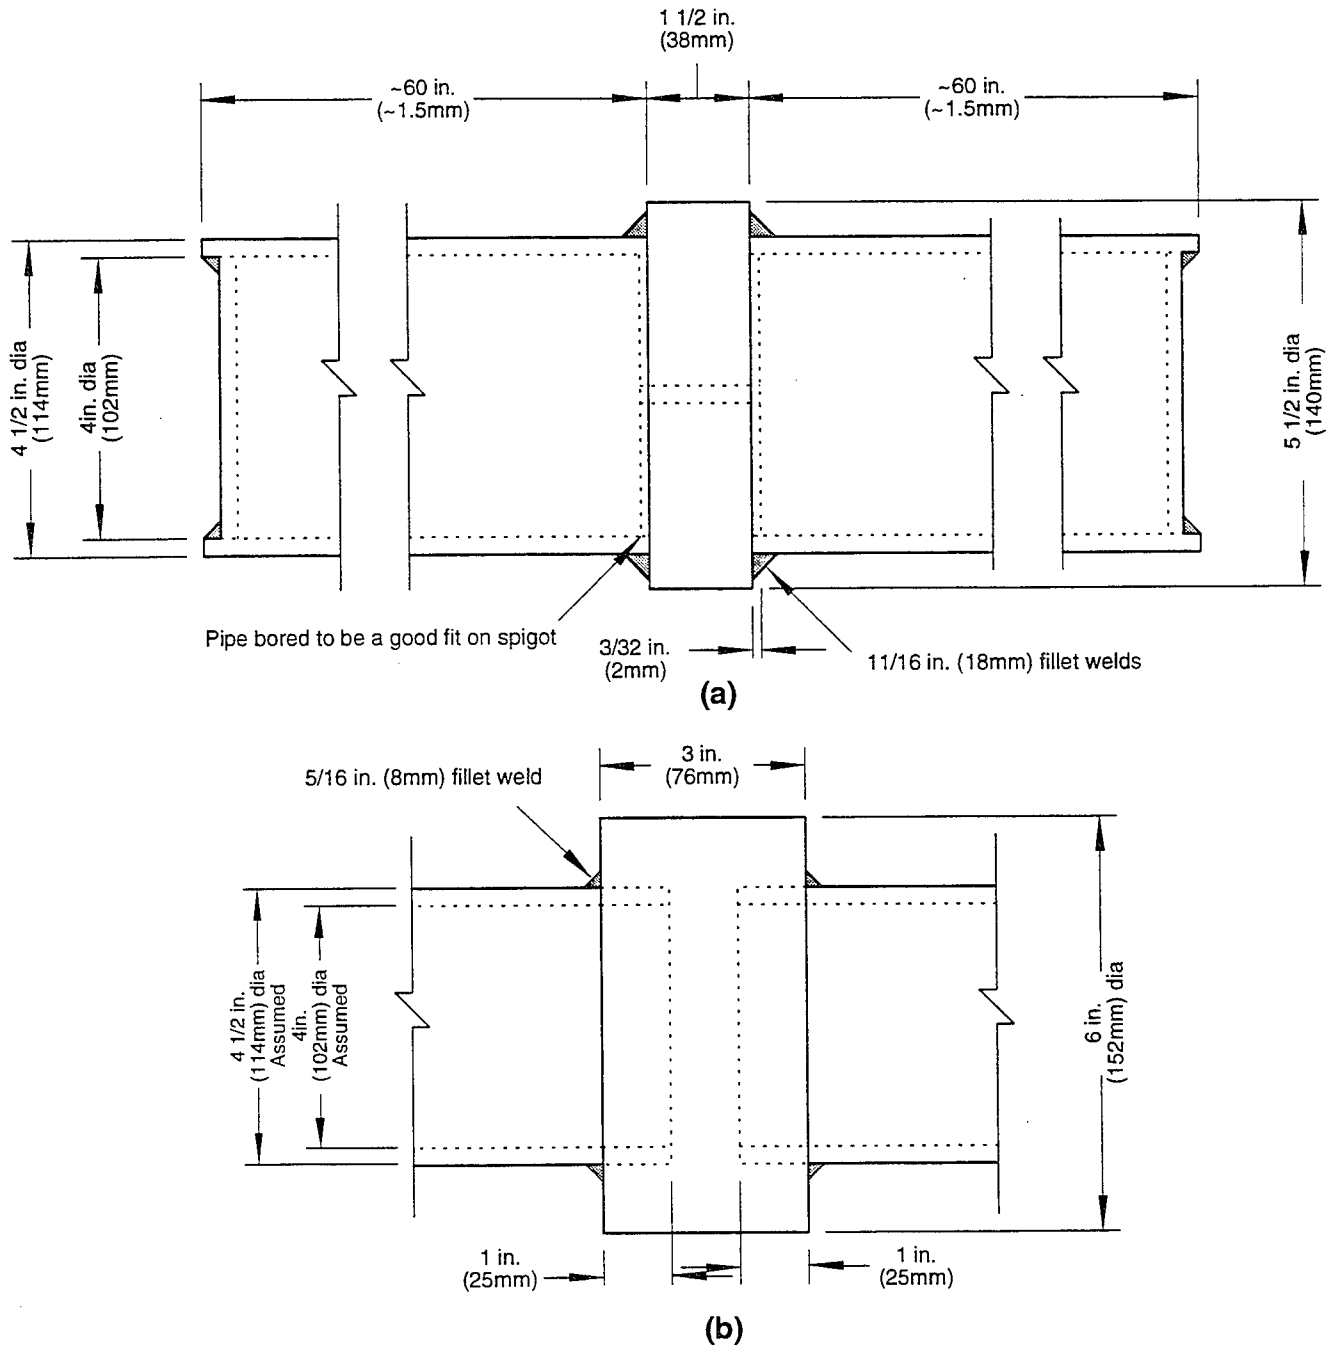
Weld details used by Archer and Gurney. (a) is their Type F specimen, (b) is Type S. Tube dimensions for their Type S specimens are assumed to be the same as those of the Type F specimens. Loading was in rotating bending.
